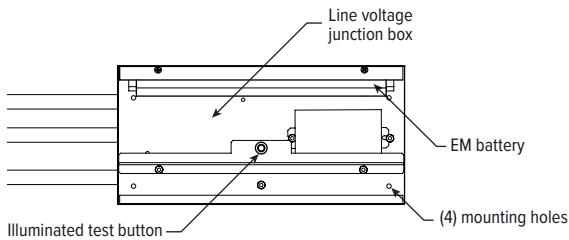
RDB1 Remote driver enclosure for single fixture with EM/12W
